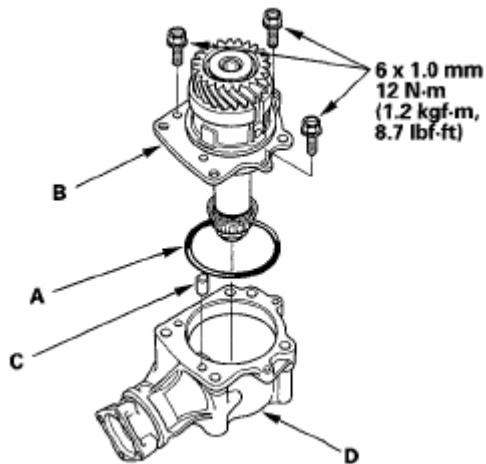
Identifying O-Ring, MTF, Transfer Holder Assembly And Dowel Pin With Torque Specification
